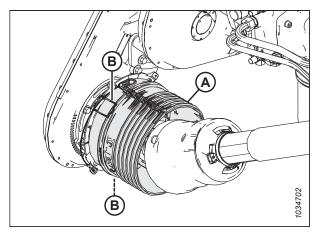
Driveline with Shield Installed on Float Module Gearbox Shaft
